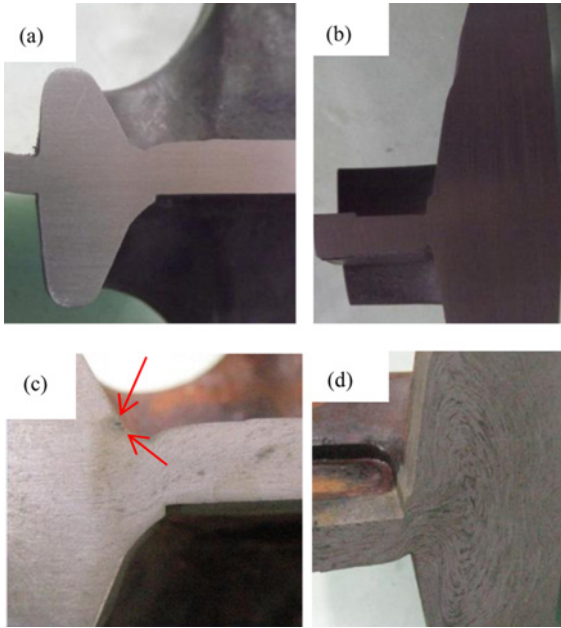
Cross sections of forging parts: (a) cross-section s1 before corroding, (b) cross-section s2 before corroding, (c) cross-section s1 after corroding, and (d) cross-section s2 after corroding
